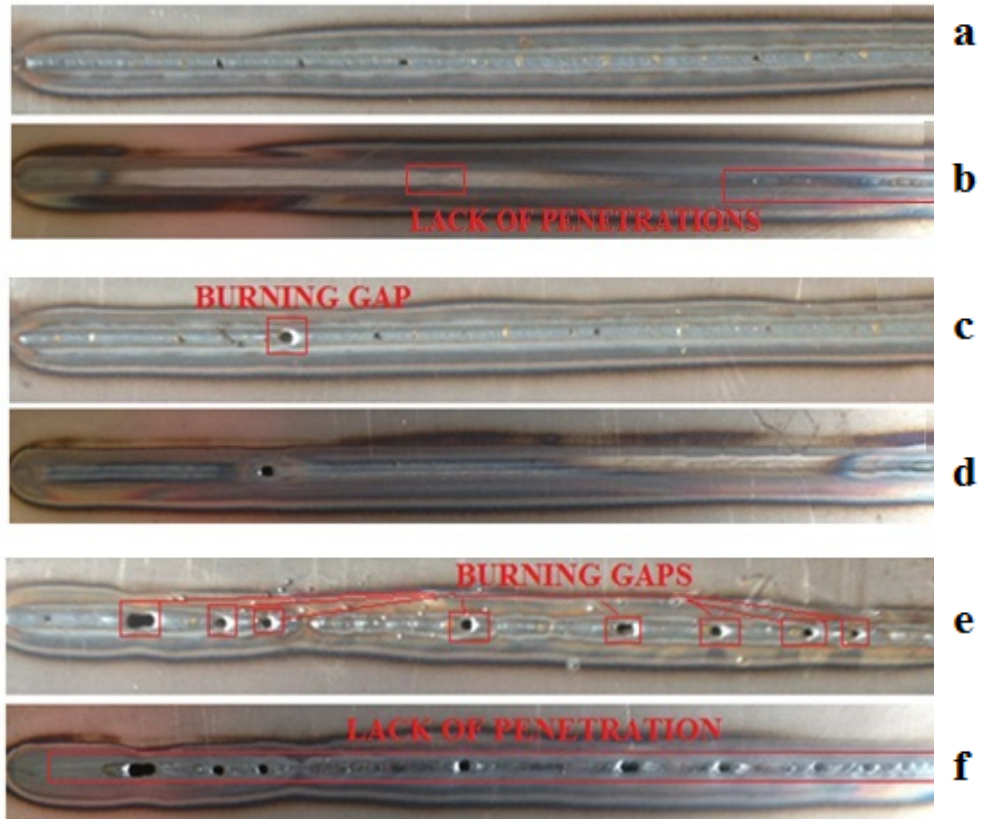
Samples obtained under the different welding conditions (a)Welding cap of 2th Run, (b) Welding root of 2th Run, (c)Welding cap of 36th Run, (d) Welding root of 36th Run, (e)Welding cap of 42th Run, (f) Welding root of 42th Run
